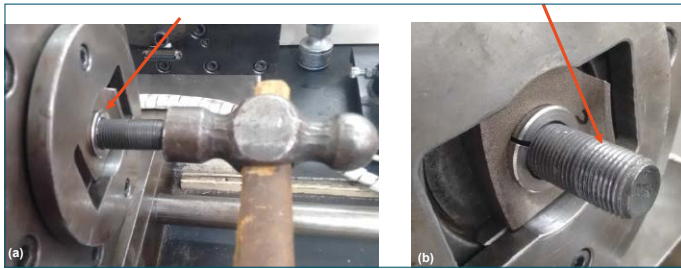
(a) Conical bushing got stuck in-between the flange and stud; (b) Phosphate coating removed by the lock nut
